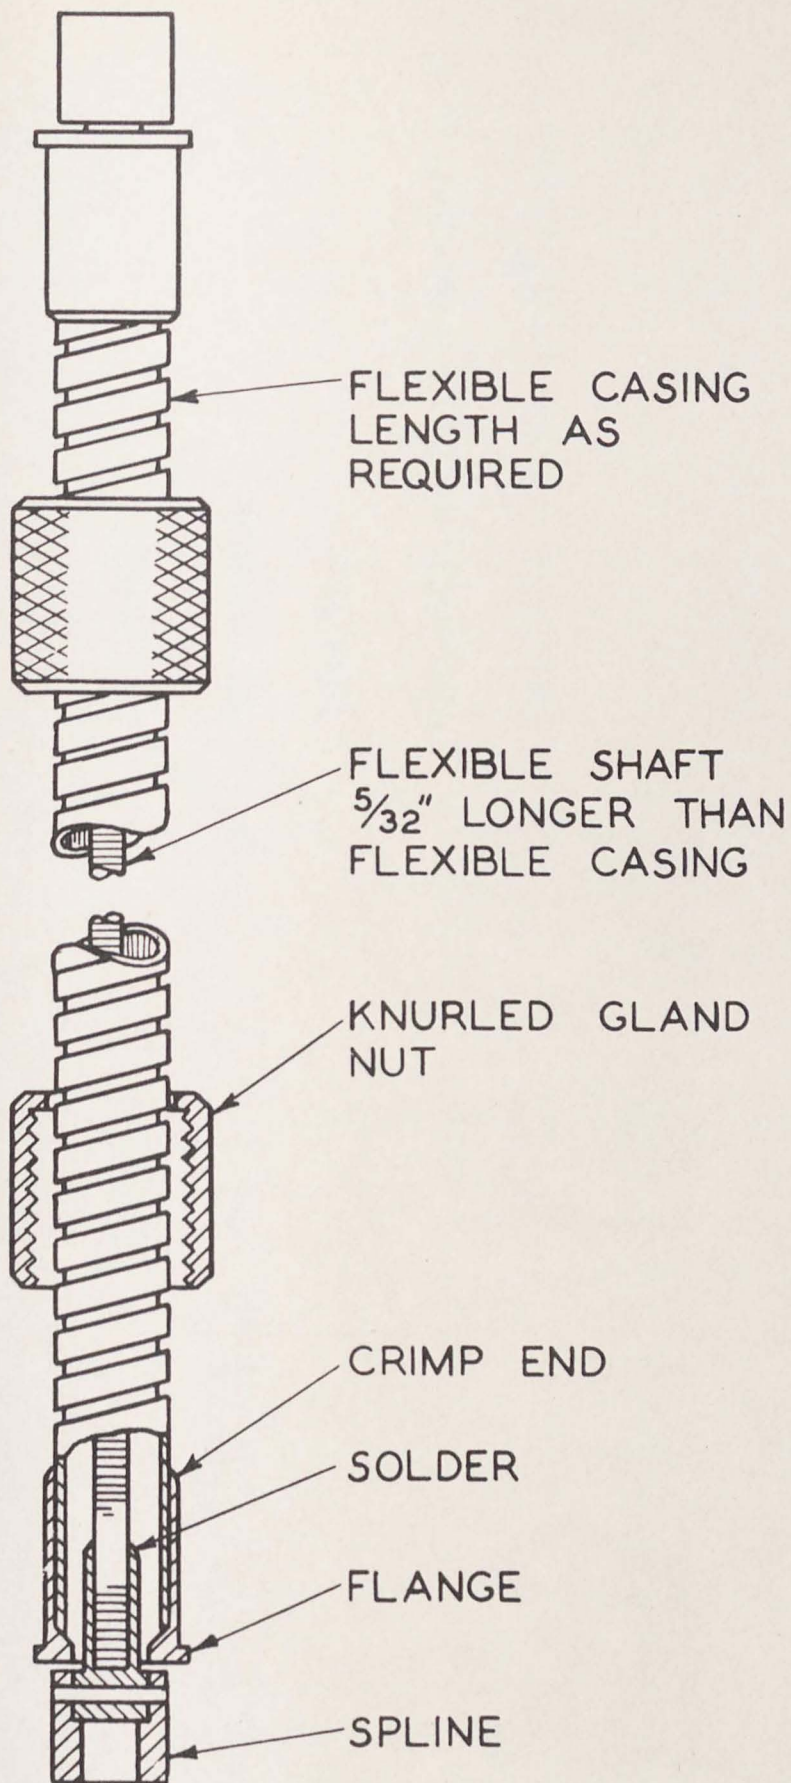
Tuning Shaft MC-124, Assembly Drawing
